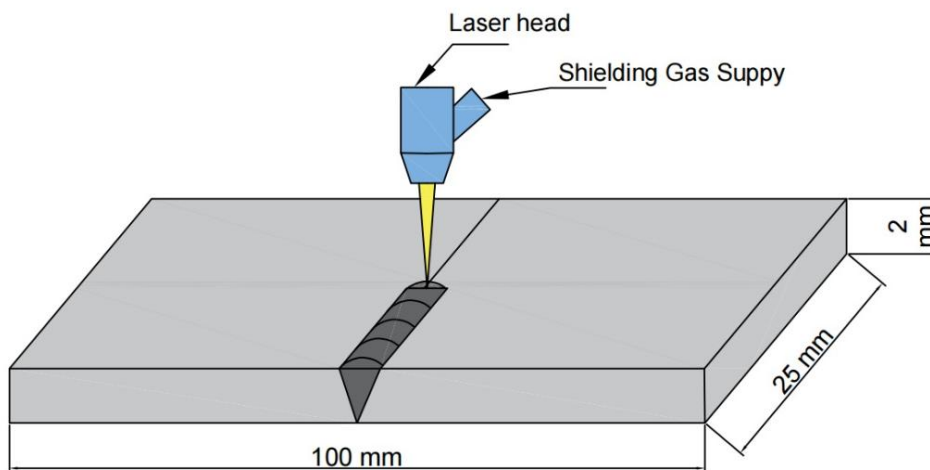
Schematic representation of experimental setup of laser welding system
